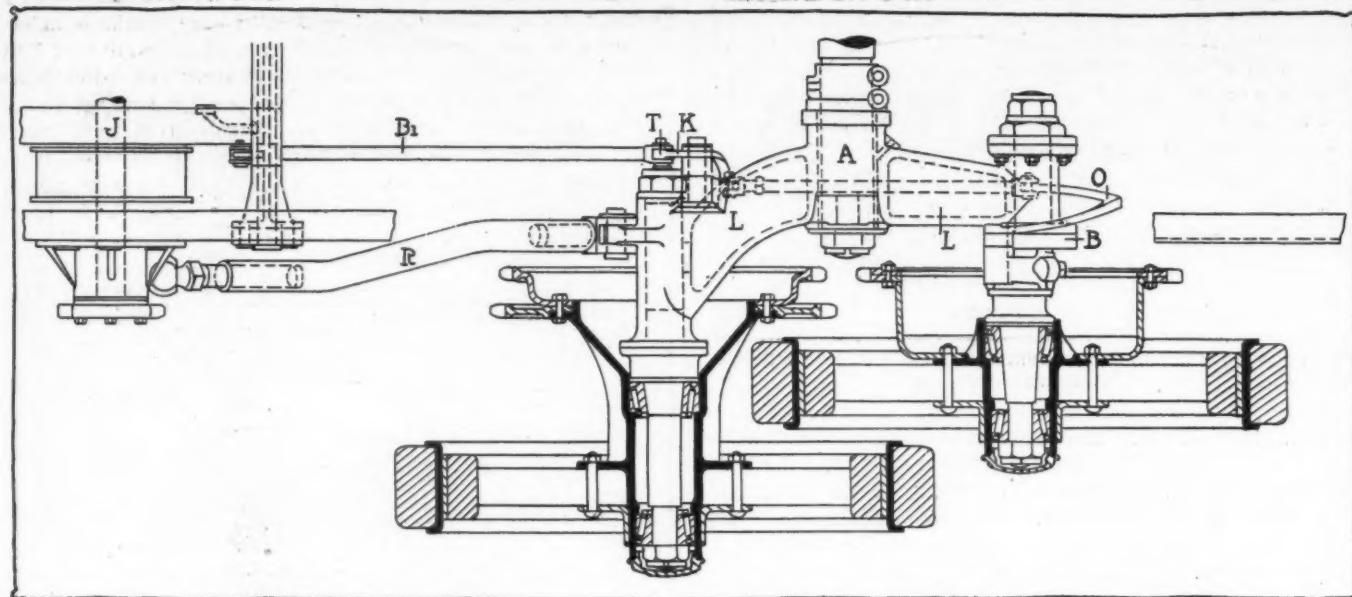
Plan view of Dow dual wheel mounted on the rear end of a 5-ton Mack truck
